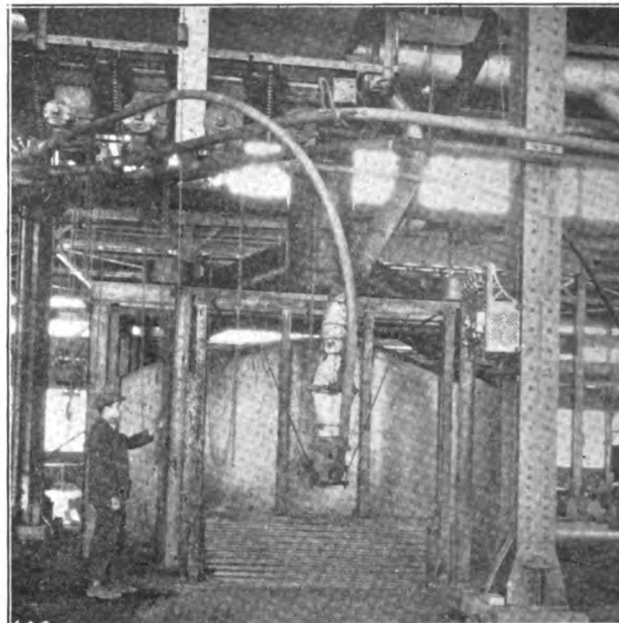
Rear view of sheet mill furnace showing burner, coal and air pipes from feeders to burners, controllers attached to bottom of powdered coal hopper and etc.
